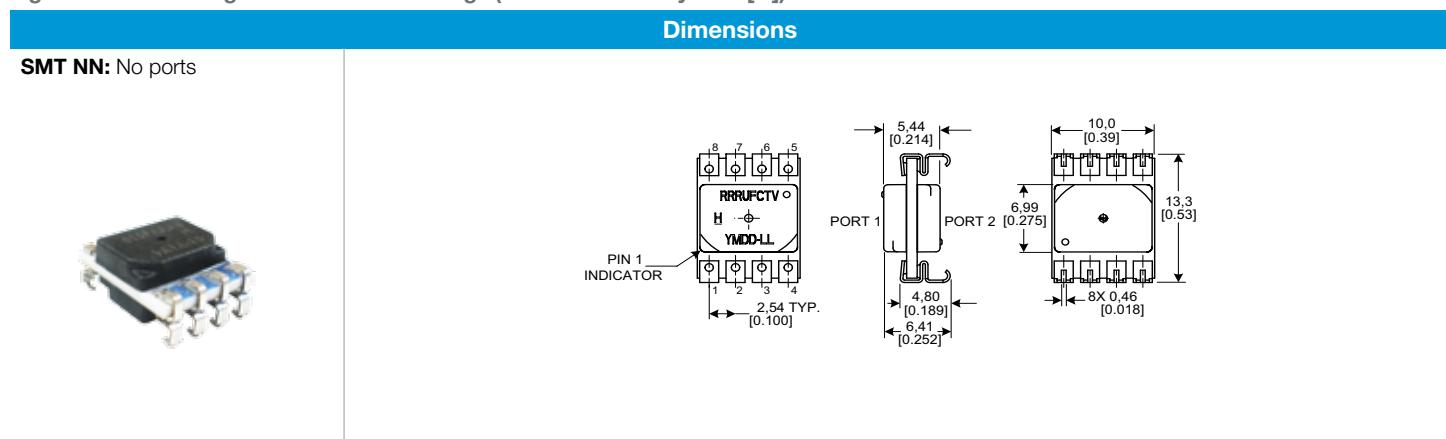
SMT Package Dimensional Drawings (For reference only: mm [in])
